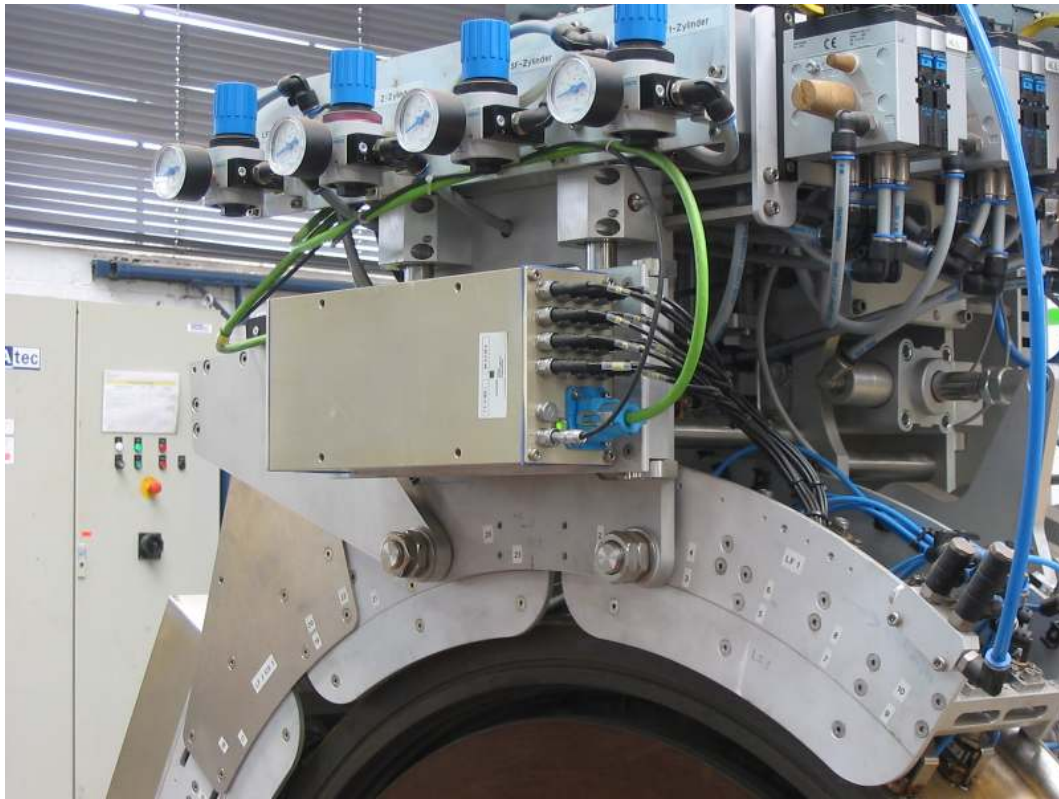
UT Front-end Electronics Mounted to the Probe System Carrier
